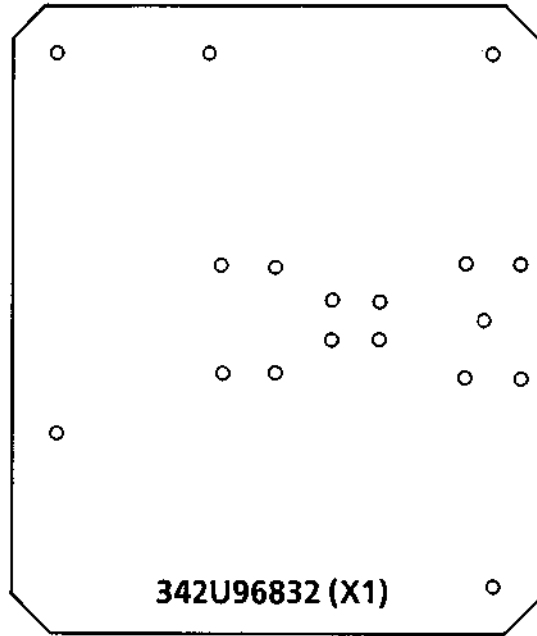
(2/2) A18-A1 ISOL AMP PC-Board Parts Layout (Pattern Side) 44
